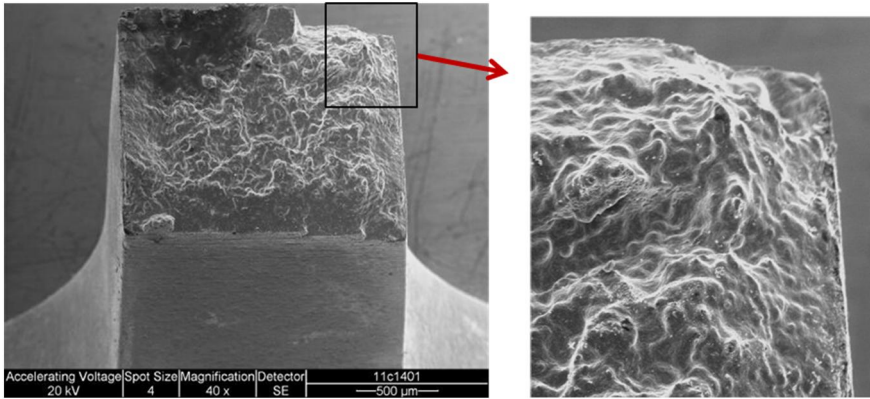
Post-test SEM photograph of the fracture surface of 14Cr ODS steel specimen after test in SCW at 550°C.
